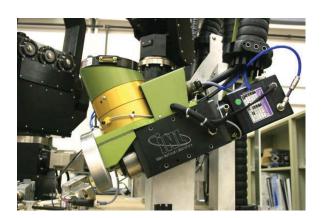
Weld dressing end effector used for wire brushing and grinding.
